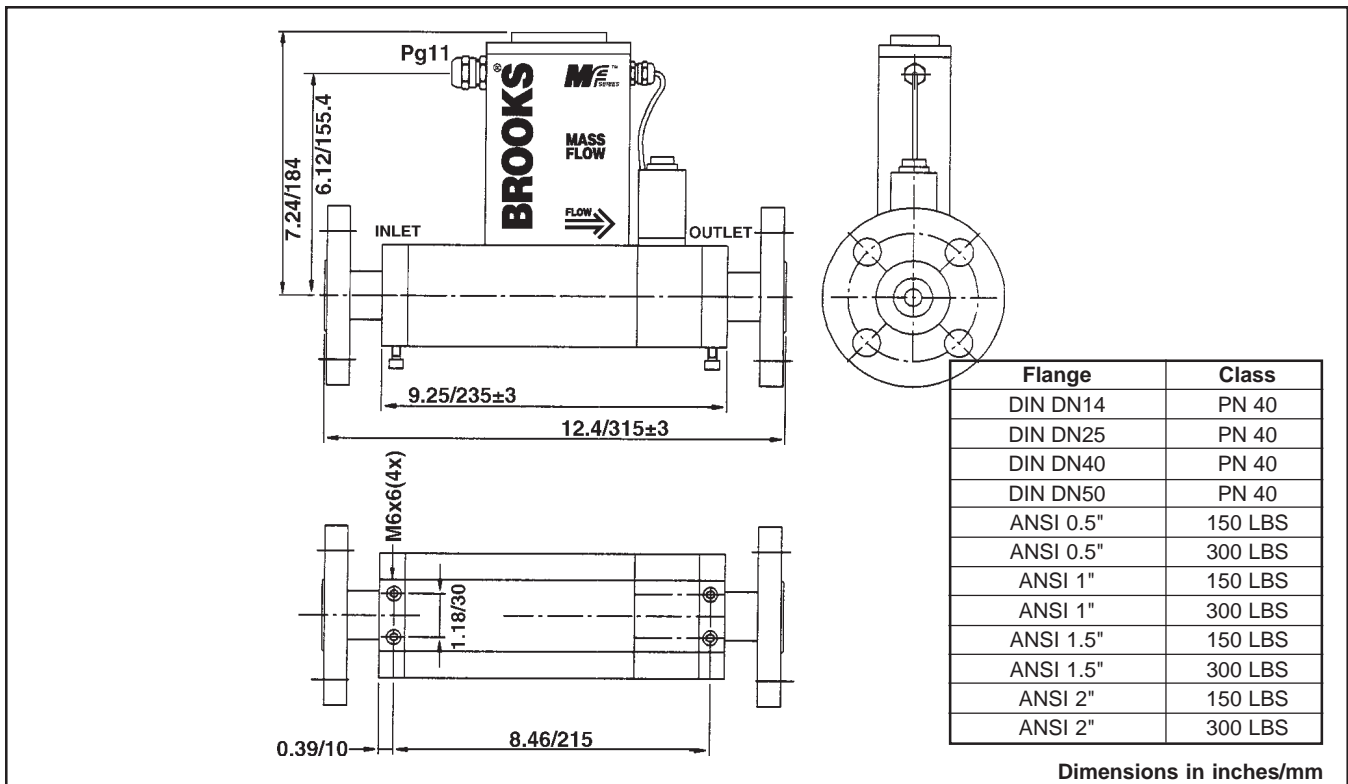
Model Mf53 Controller with Flange Dimensions
